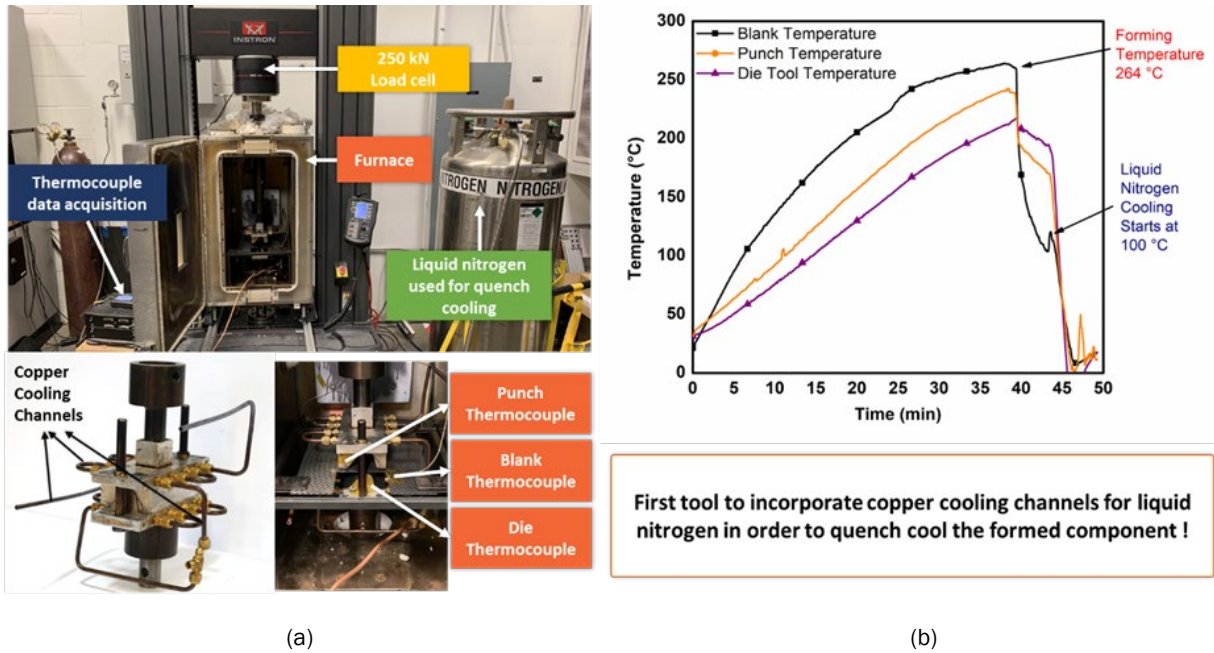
(a) Thermal chamber equipped with a thermocouple data acquisition system; and (b) liquid nitrogen cooling for thermoforming tests and thermoforming setup showing Cu cooling channels and thermocouple location.
